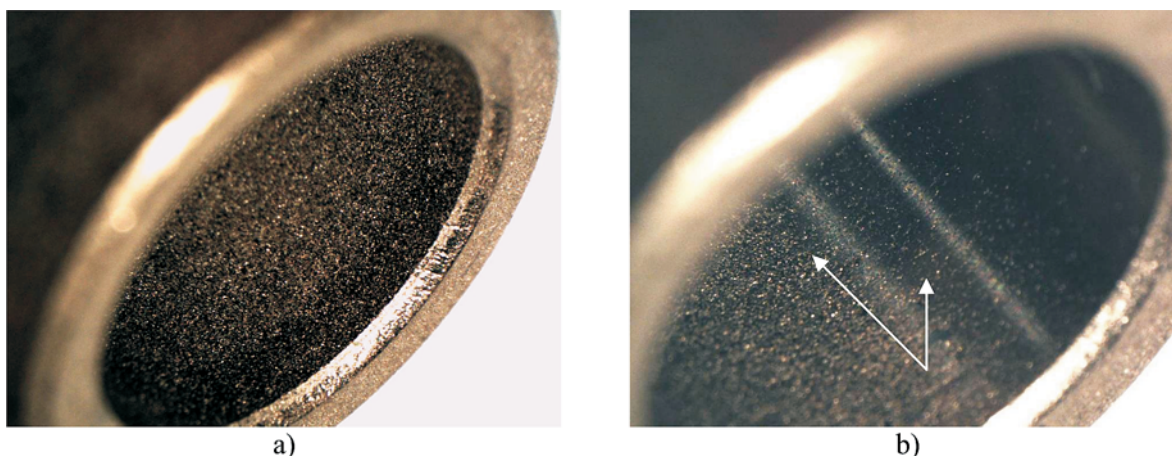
Surface before the friction measurement (a) and surface after the friction measurement (b)
